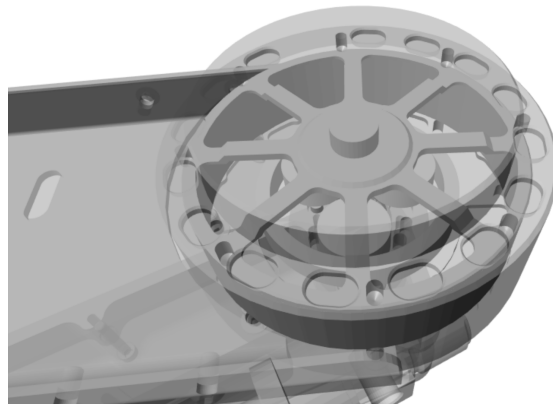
Rotor visible inside the slightly transparent motor casing. The ring and three planet gears in the epicyclic gearbox are also partially visible underneath the rotor.
